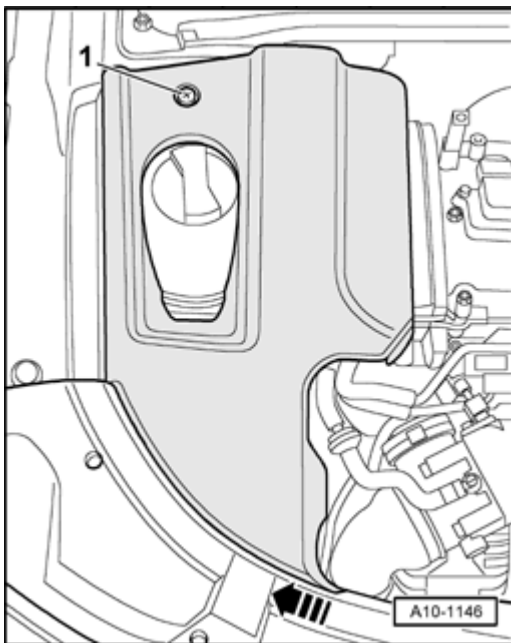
Removing Screw And Coolant Expansion Tank Cover
